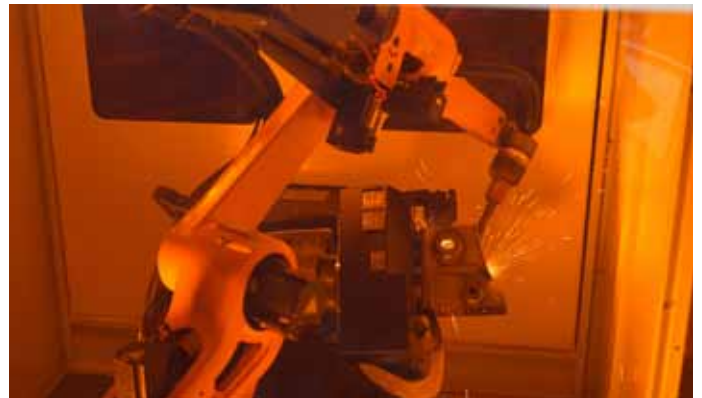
Each welding cell is equipped with a QIROX QRH-280 welding robot as well as a two-station workpiece positioner.
